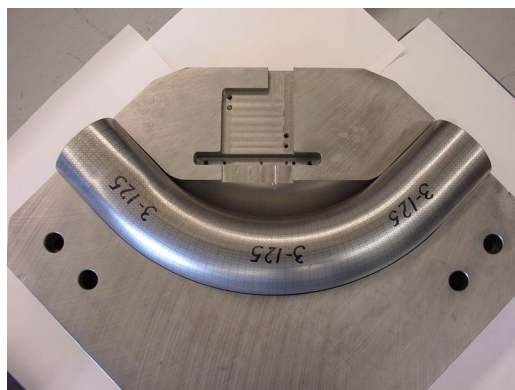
Section of hydroform die and bent tube for inside radius expansion tests.
